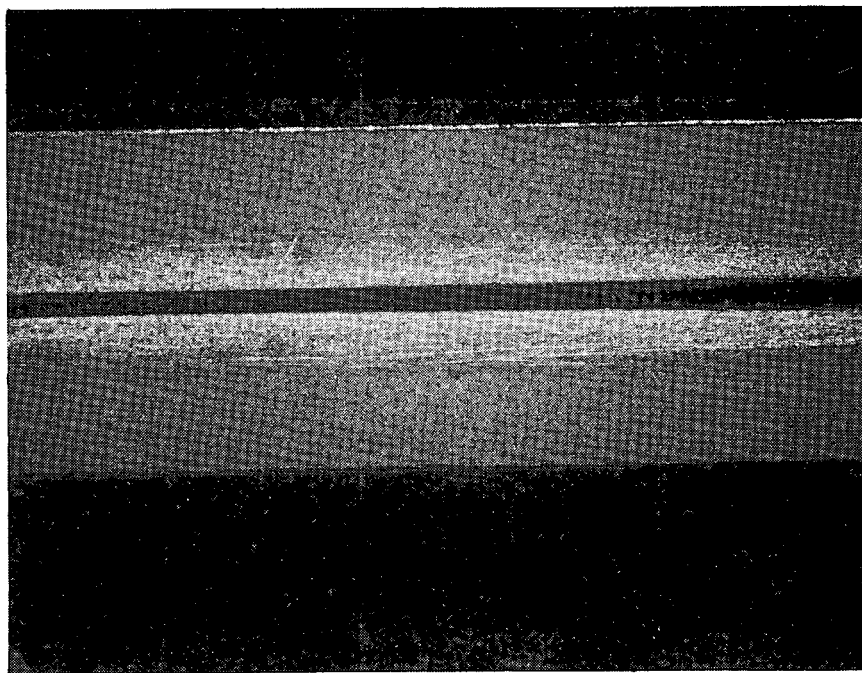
Longitudinal section of weld made on 0.080-in. (0.203-cm) thick Mulberry at 300 cps (11.5 X).
